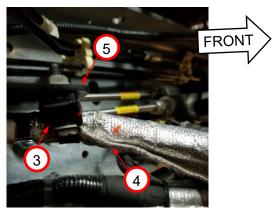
LP filter bracket (5), clamp (5), LP fuel hose (4).
